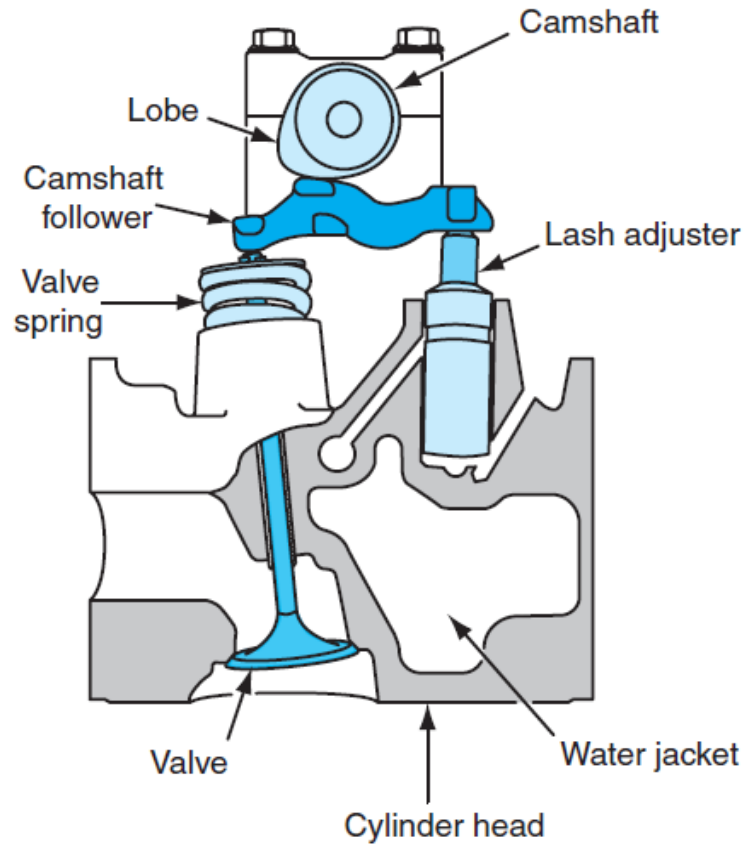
Overhead cam design (Automotive Engineering, 2013)
